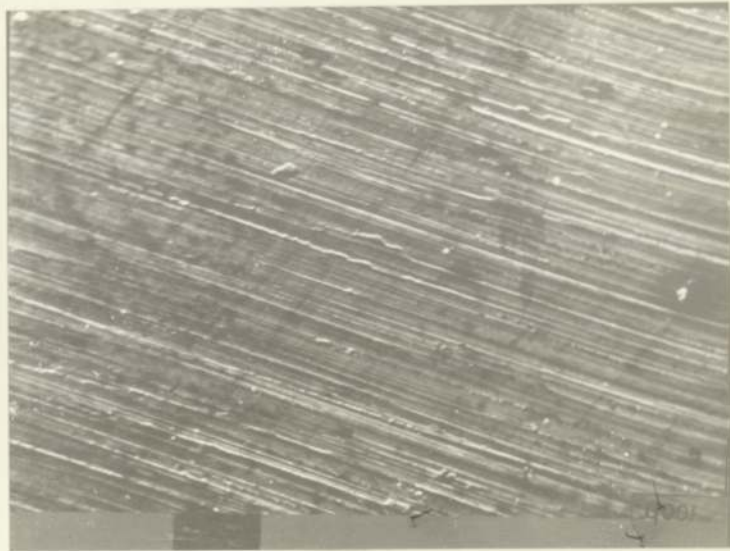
A view of the surface of a hard Cr plated No.5 die after 100 cycles hot forging showing a glaze of cracked oxide layer.
